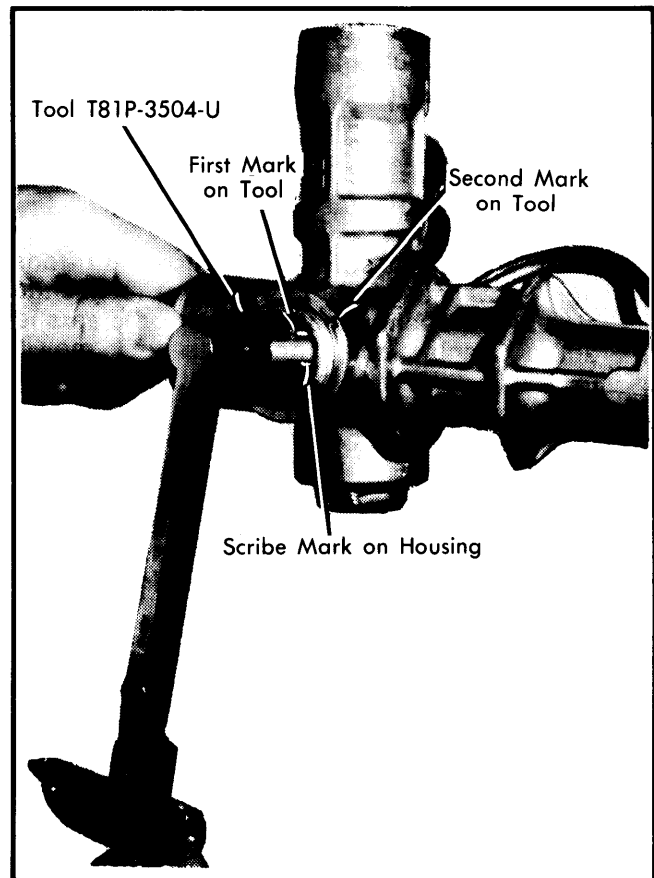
Escort and Lynx Yoke Bearing Adjustment
